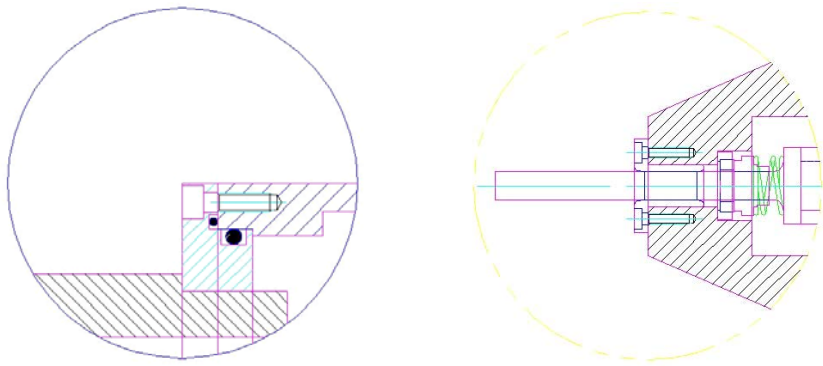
Waterproof design of cylinder cover and motor rotor
